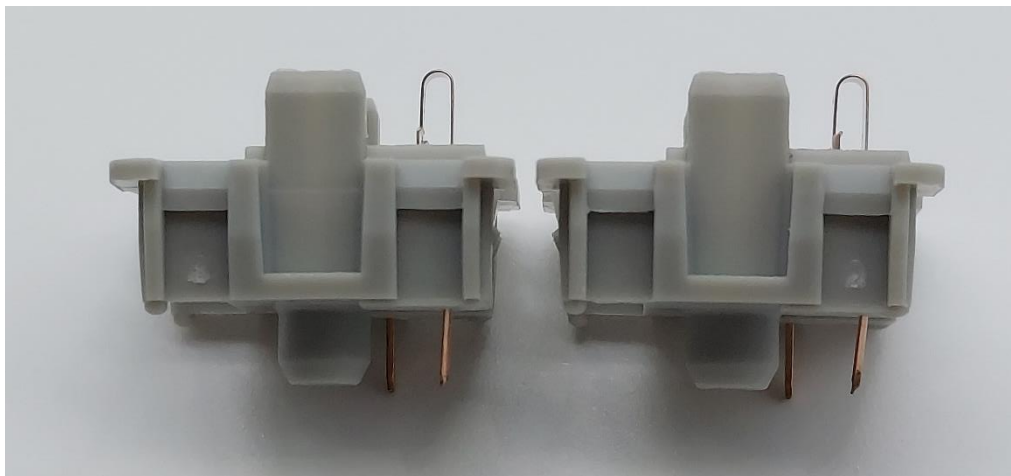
Mold sprue marking on Frog V3 switches. Left is representative of mold 4 whereas the right is representative of mold 8.
